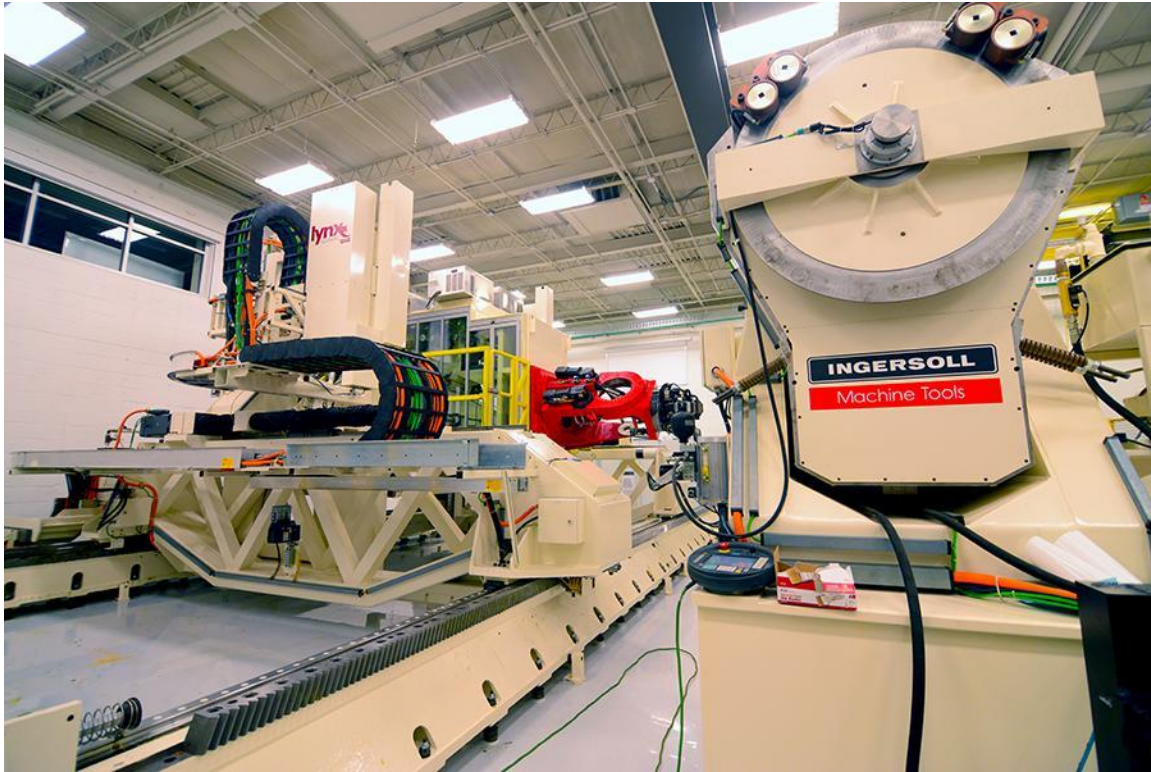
Ingersoll Machine Tools Lynx AFP Machine at McNair Center
